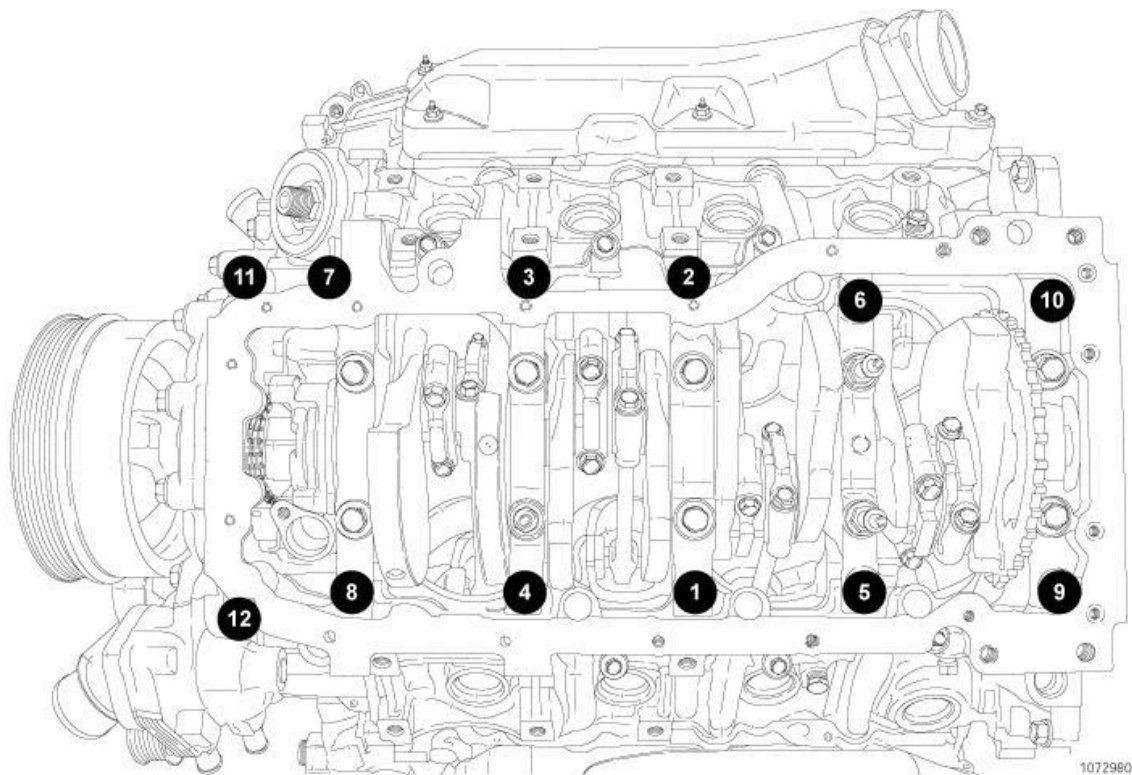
Tightening Bedplate Bolts (2 Of 4)
